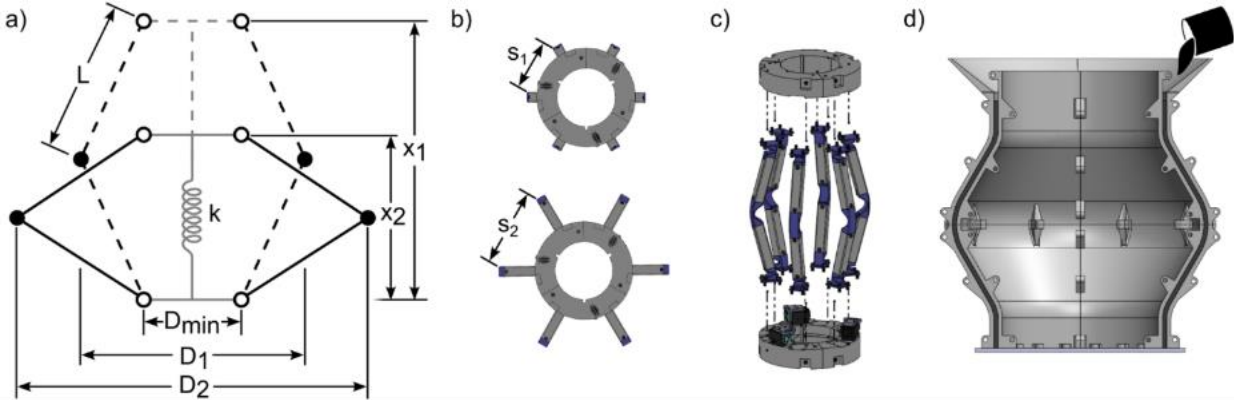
Various illustrations of robot measurements, parts, and components, a) Kinematic design parameters of a single robotic worm segment (Mills, 2025), b) Axial view of the segment (Mills, 2025), c) Exploded view illustrating six radially repeated two-bar linkage assemblies (Mills, 2025), d) Schematic of the elastomer skin molding process (Mills, 2025).
